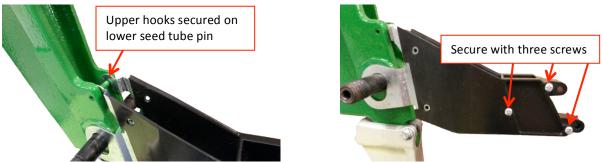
Quick Attach Keeton Firmer Bracket Installed
